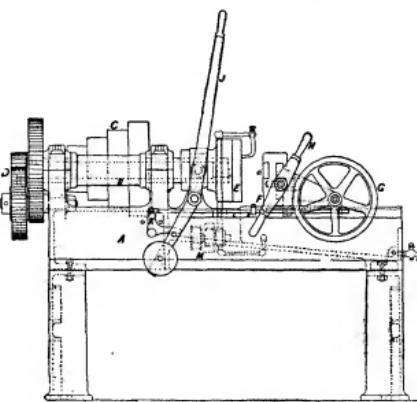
Bolt-Screwing Machine (John Stirk &amp; Sons, Ltd., Halifax).
